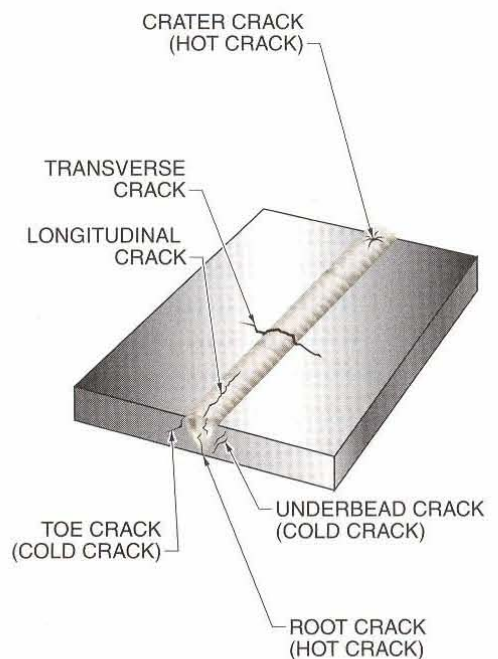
Cracks are classified according to their location in the weld.
